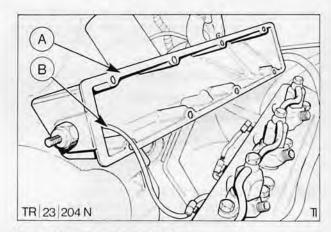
Removal of inlet manifold A - Inlet manifold B - Glow plug loom connection
